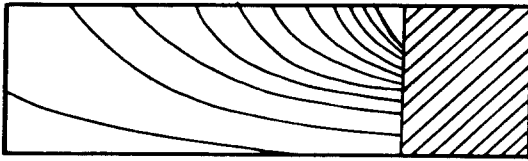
Macrograph of beach marks of fracture surface.
